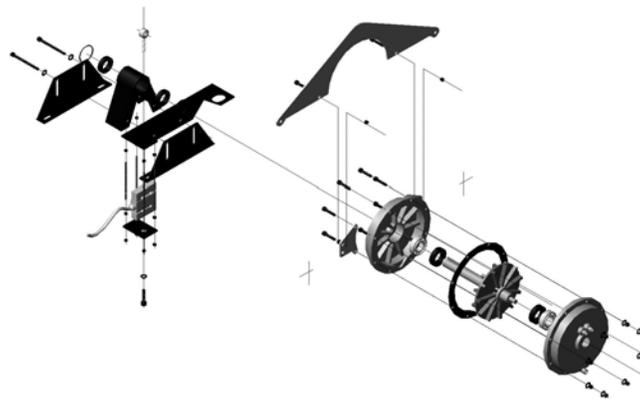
Go-Power DY-7D Dynamometer - Exploded View
